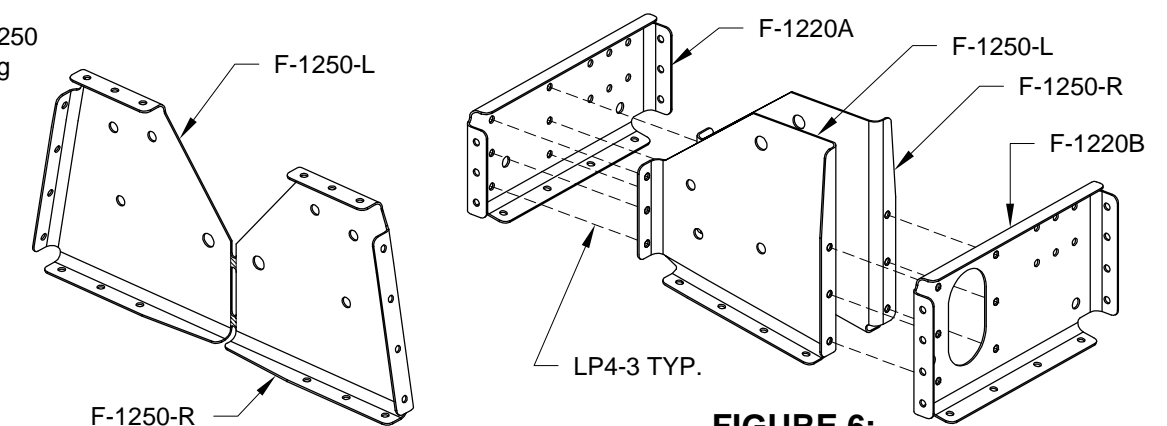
SEPARATING THE PULLEY BRACKETS
